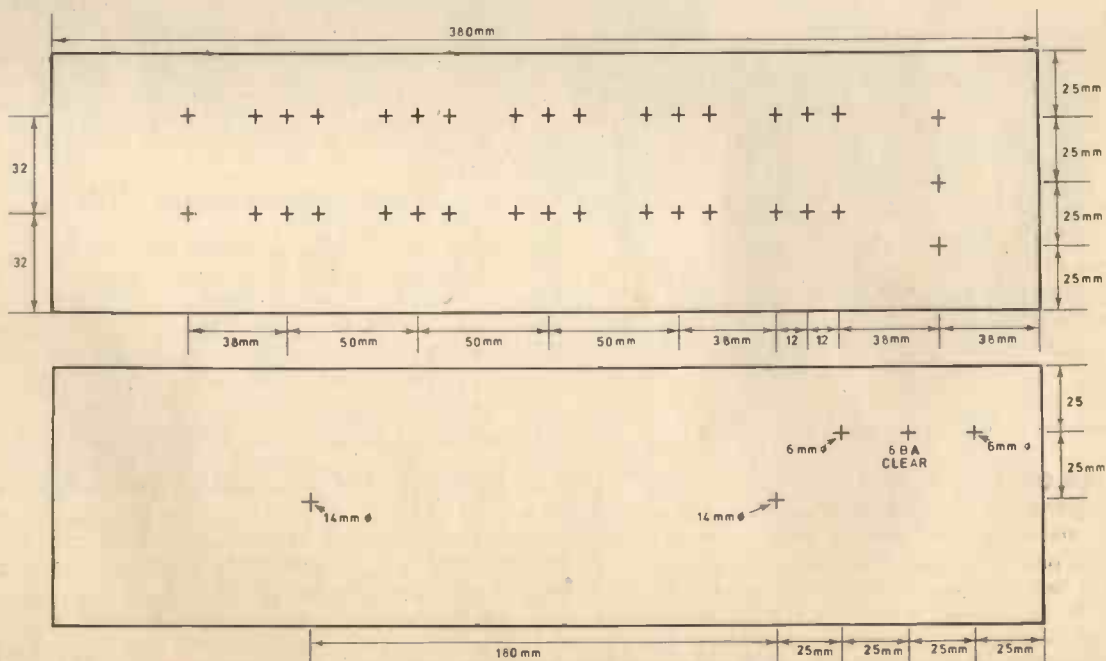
Case drilling details. Front panel (top), rear panel (bottom)
